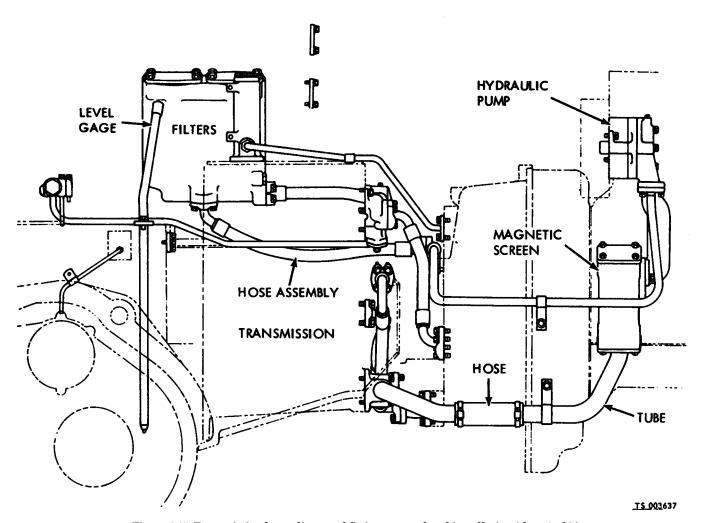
Transmission hoses, lines, and fitting, removal and installation (sheet 1 of 2).
